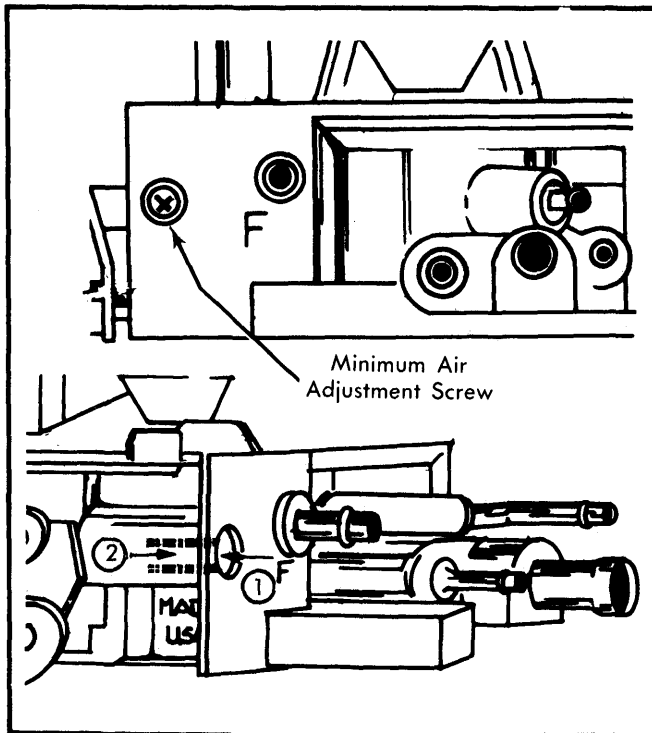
Plug Removal for Minimum Air Adjustment Screw
